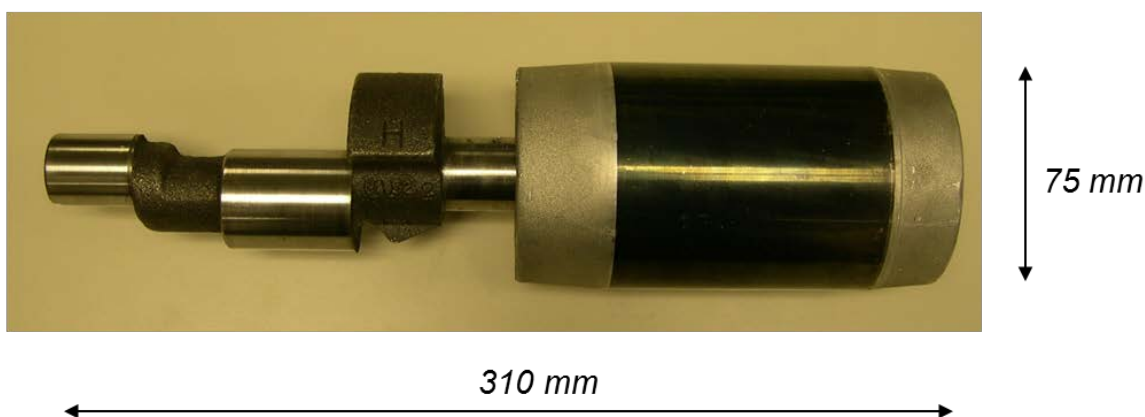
Example of a Residential Air Conditioner Compressor Motor
